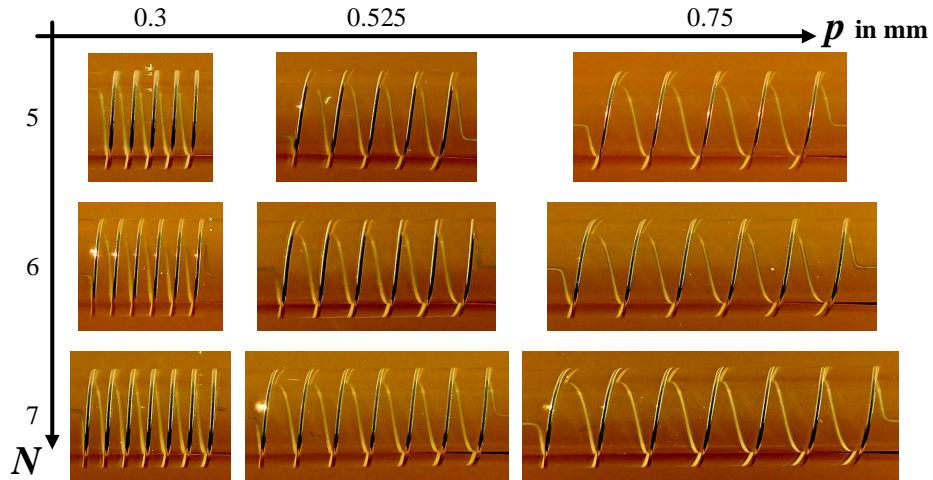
Extrusion printed solenoid coil variants on glass tubes.
